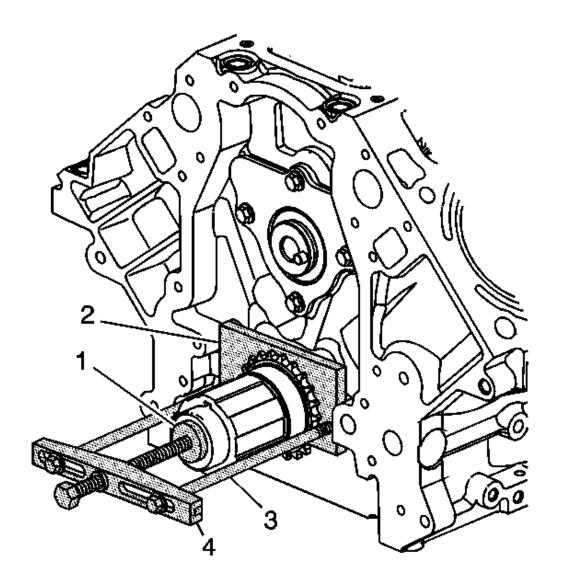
View Of Crankshaft Sprocket Special Tools Courtesy of GENERAL MOTORS CORP.
